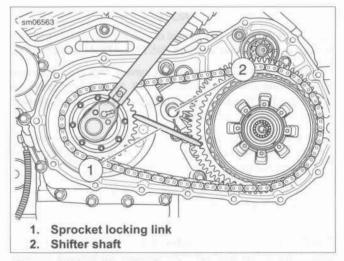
Tighten Engine Sprocket Fastener (typical)
